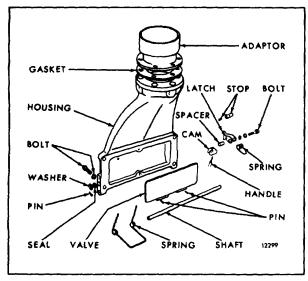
Typical Current Cam and Latch Type Air Shutdown Housing Details and Relative Location of Parts.
